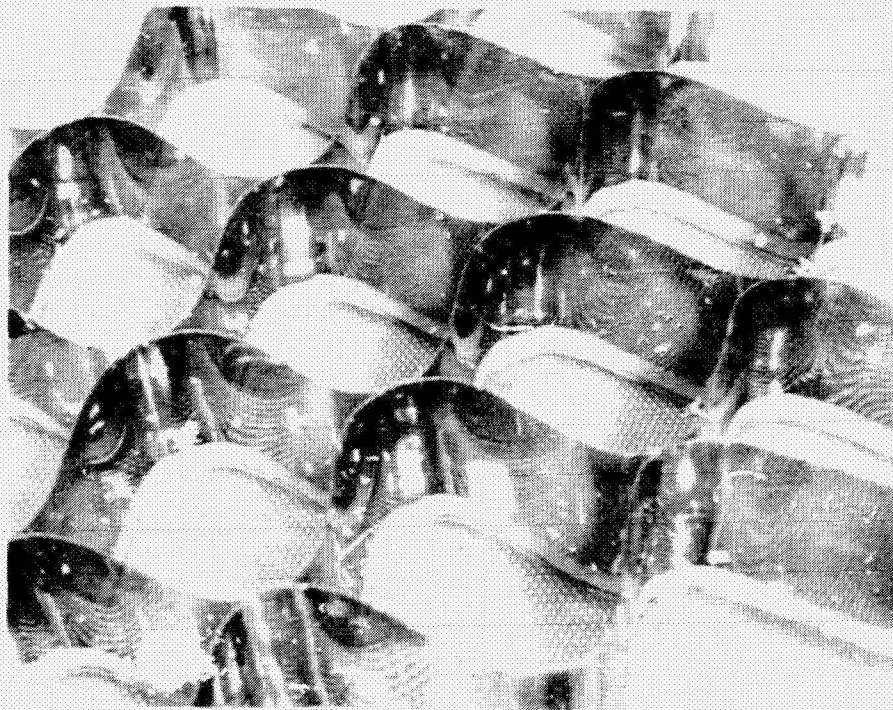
Polyimide Bonding Specimen - Tank Wall Side
